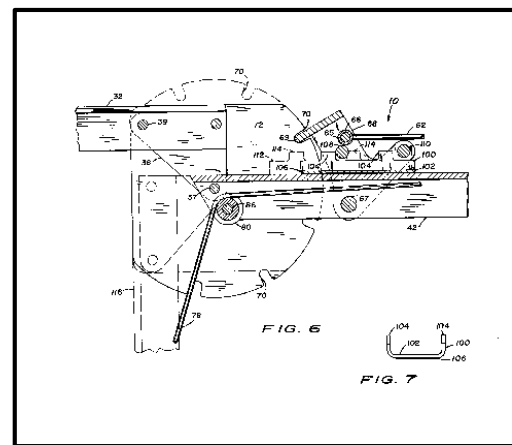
Locking Mechanism of Lock-Type Gripping Device for Handicapped Persons
